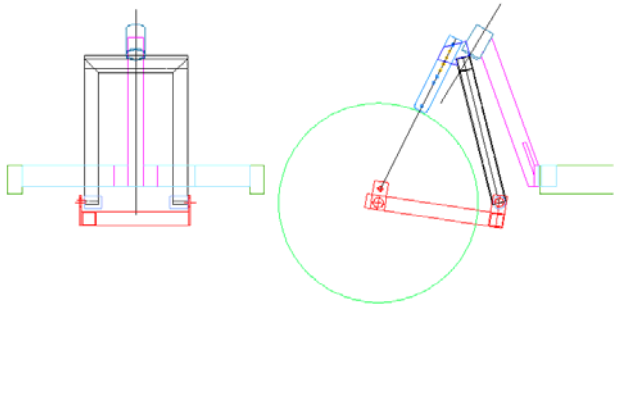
AutoCAD® drawing of the BUV front end assembly based on the Trimuter concept.
